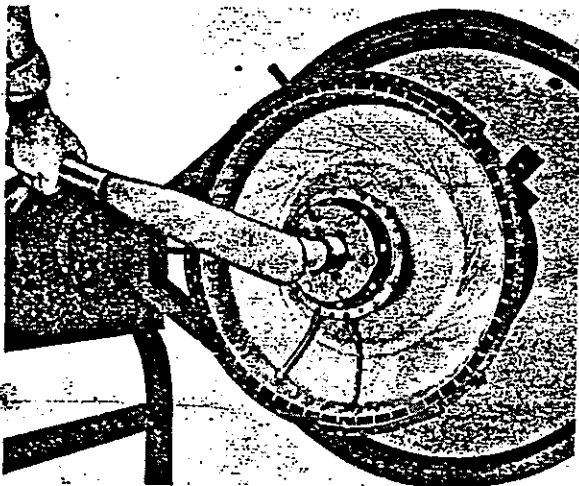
Breaking Torque on Rear Bearing Compressor Shaft Nut
